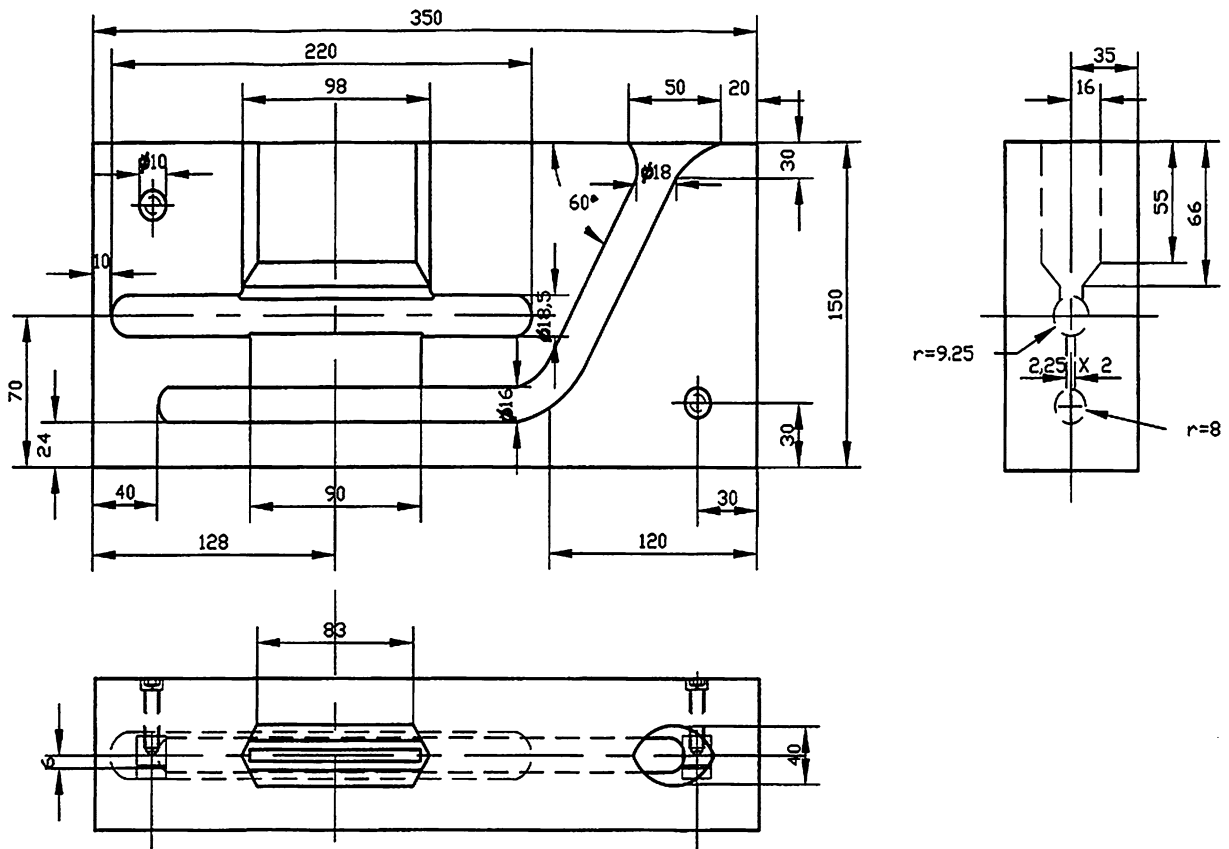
Mold for manufacturing tensile and fatigue tests, including the gating system; dimensions are provided in millimeters.
